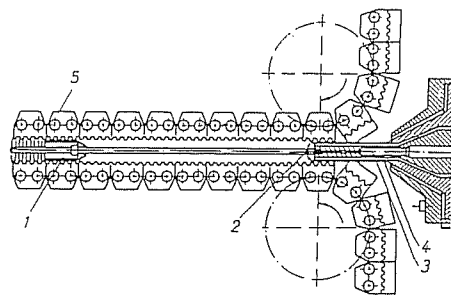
Manufacture of corrugated pipes [4], 1 Floating plug, 2 Compressed air outlet, 3 Mandrel, 4 Die, 5 Chain with corrugated internal surface
